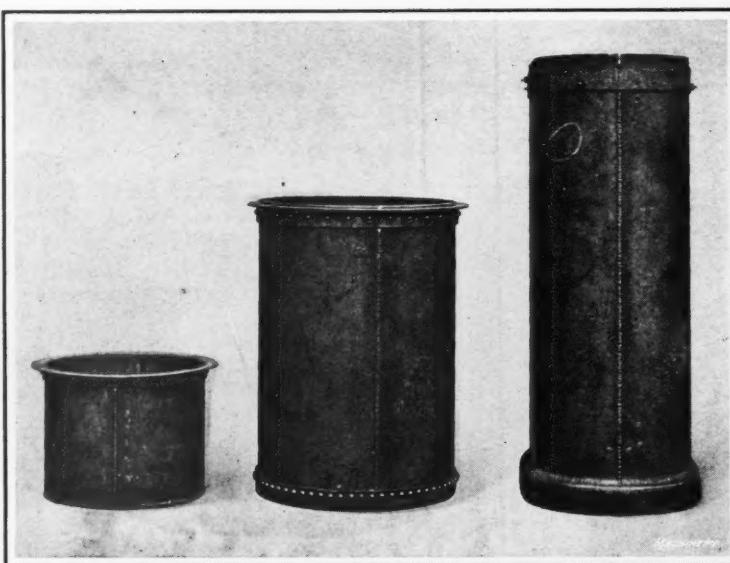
Tanks welded by Electric Arc, using Metallic Electrode
